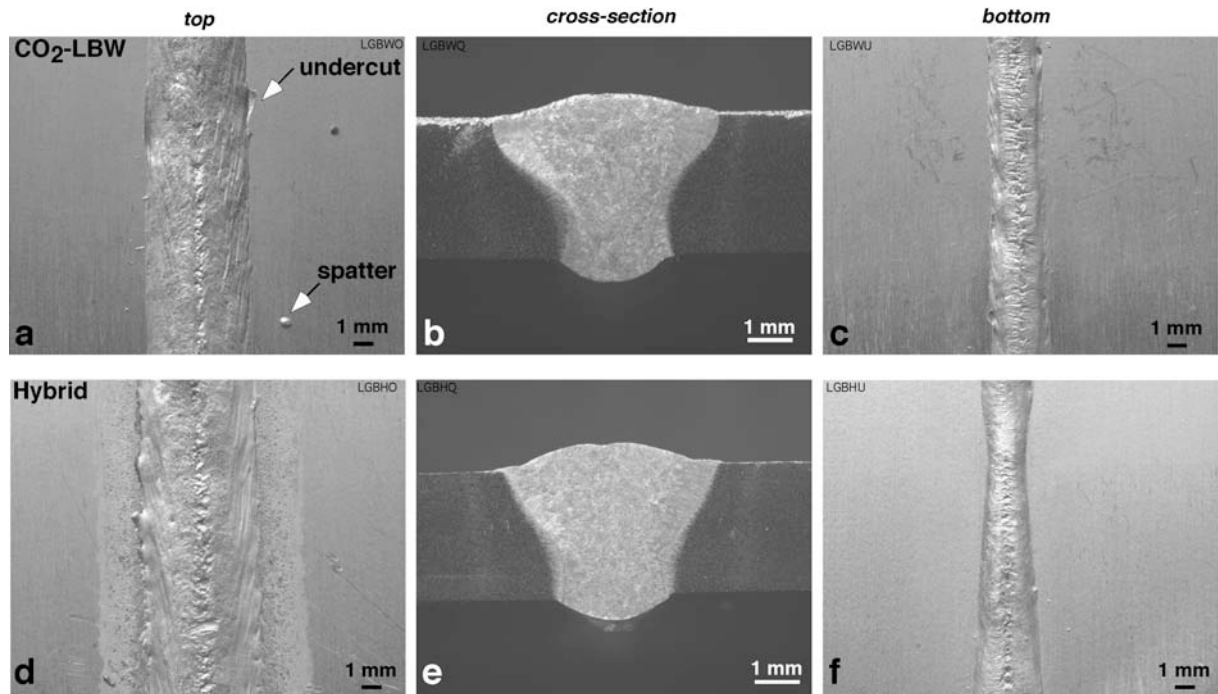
Surface appearance of the CO<sub>2</sub> laser beam weld (upper macrographs; a-c) and the hybrid weld (lower macrographs; d-e) in a 3.2 mm thick AA6013 sheet butt-welded in T6. The surface was cleaned, the cross-section was polished and lightly etched. Local height differences in the weld are seen as surface irregularities.
